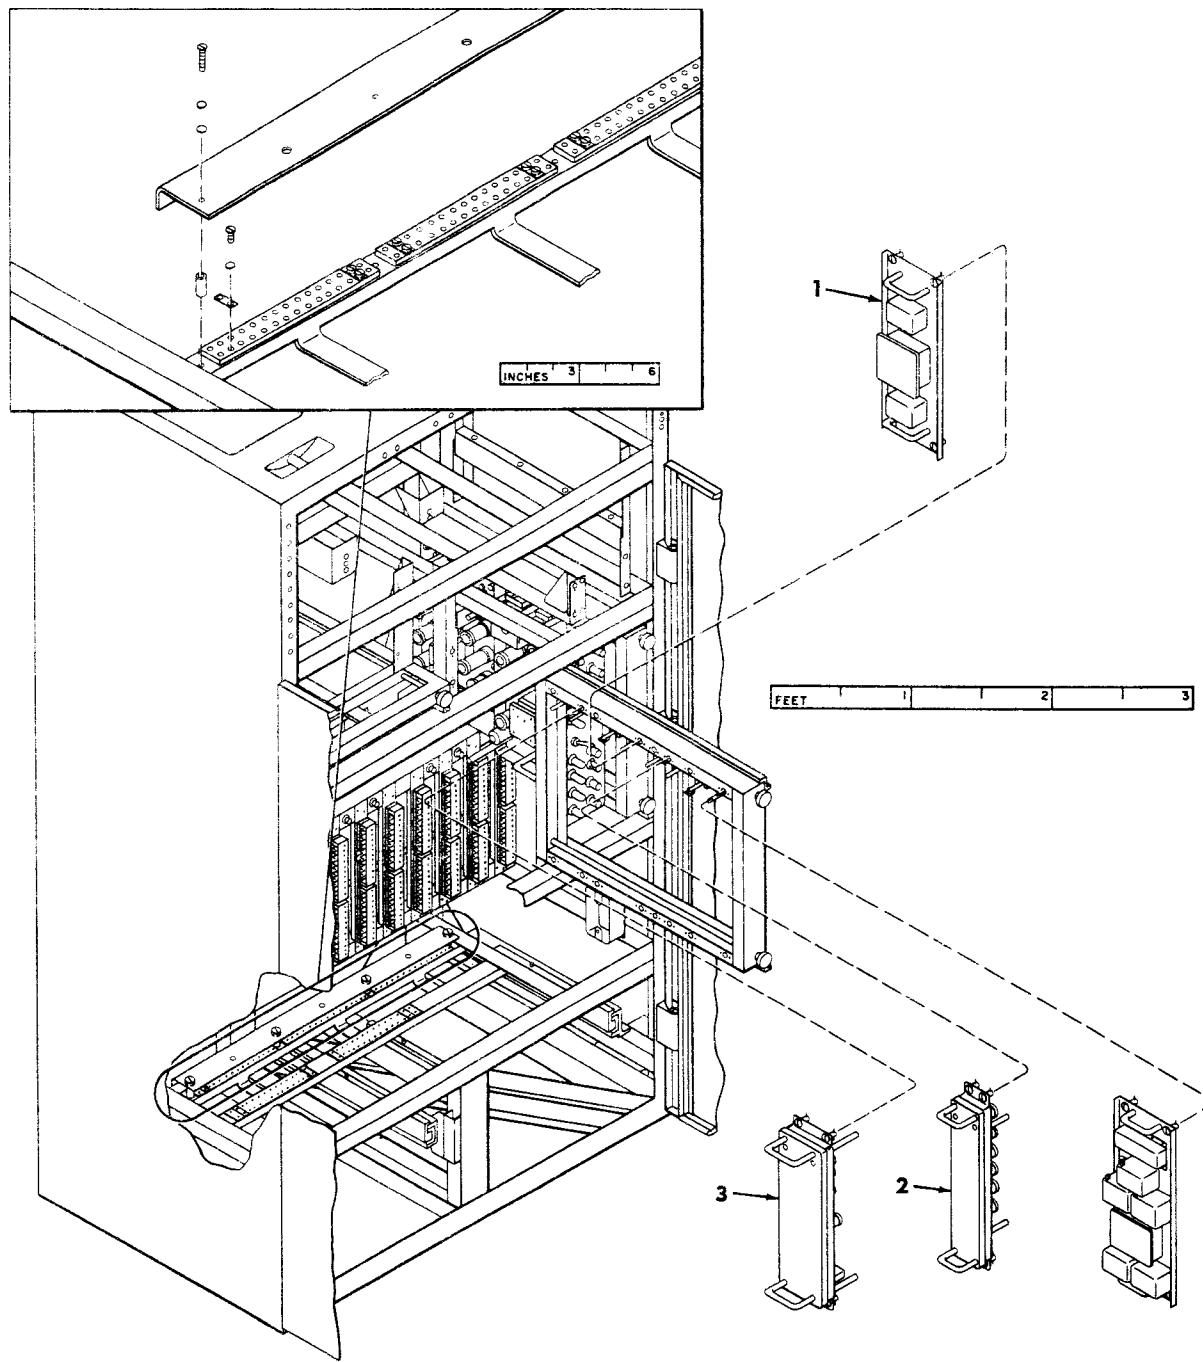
Control, receiver-transmitter (9141310) – partial exploded view
